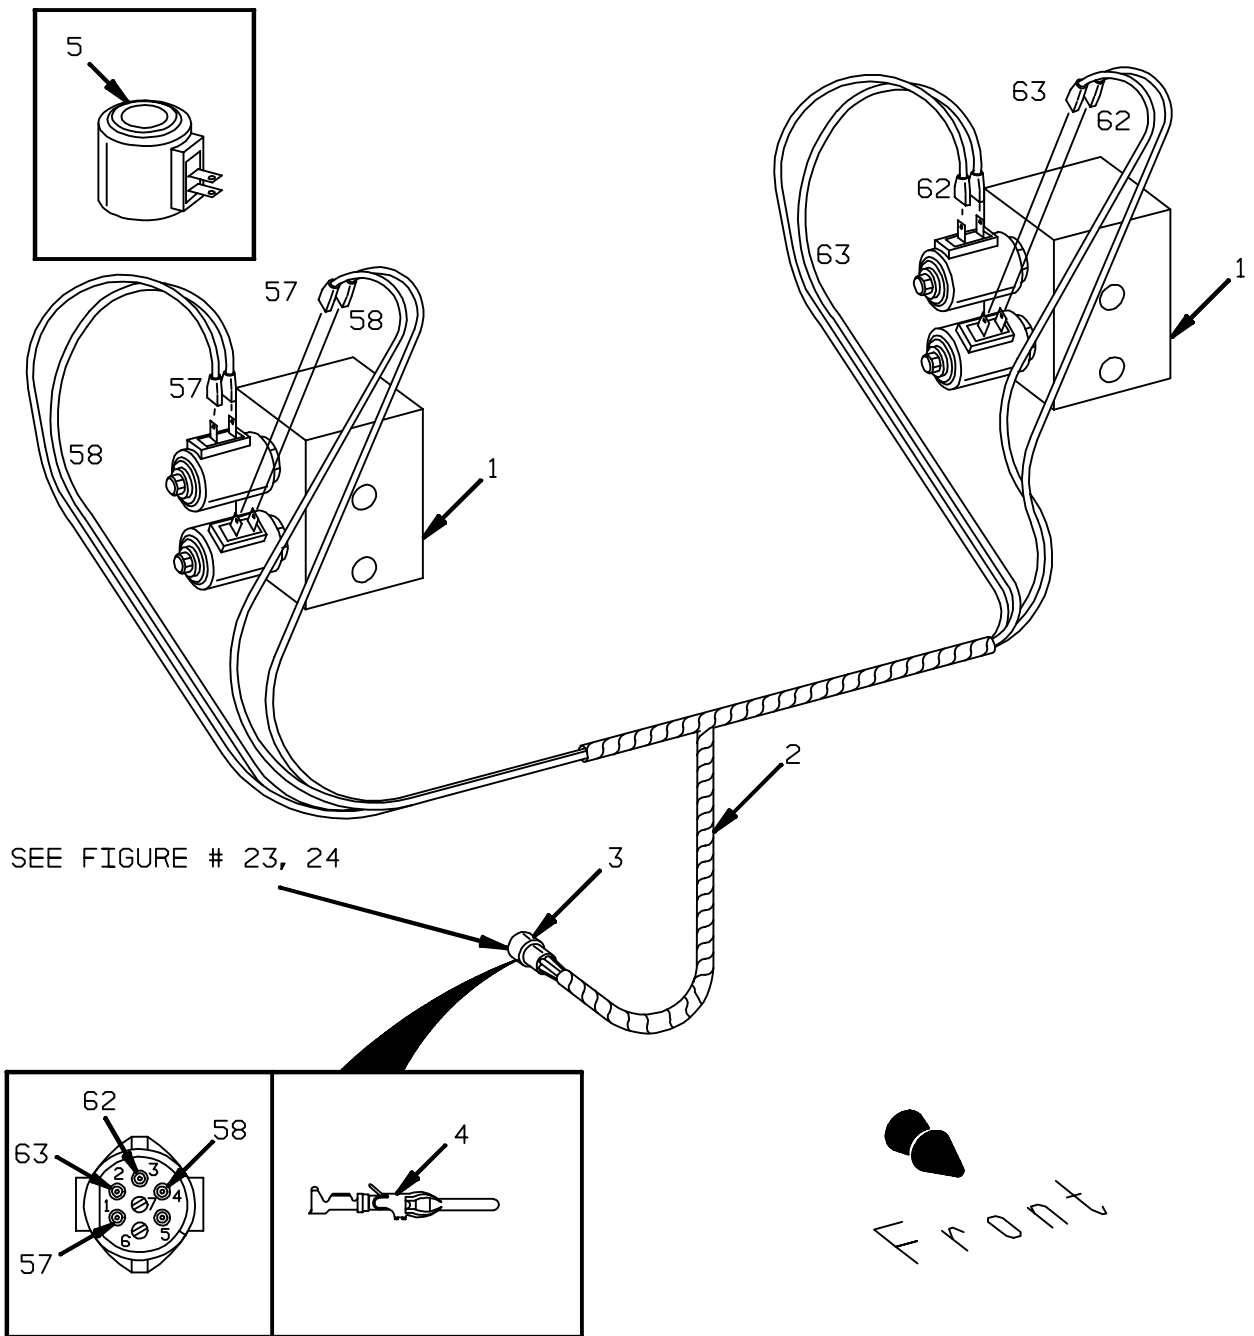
EV-100LX SCR FORWARD & REARWARD CONTACTOR ASSEMBLY (27692-00)
